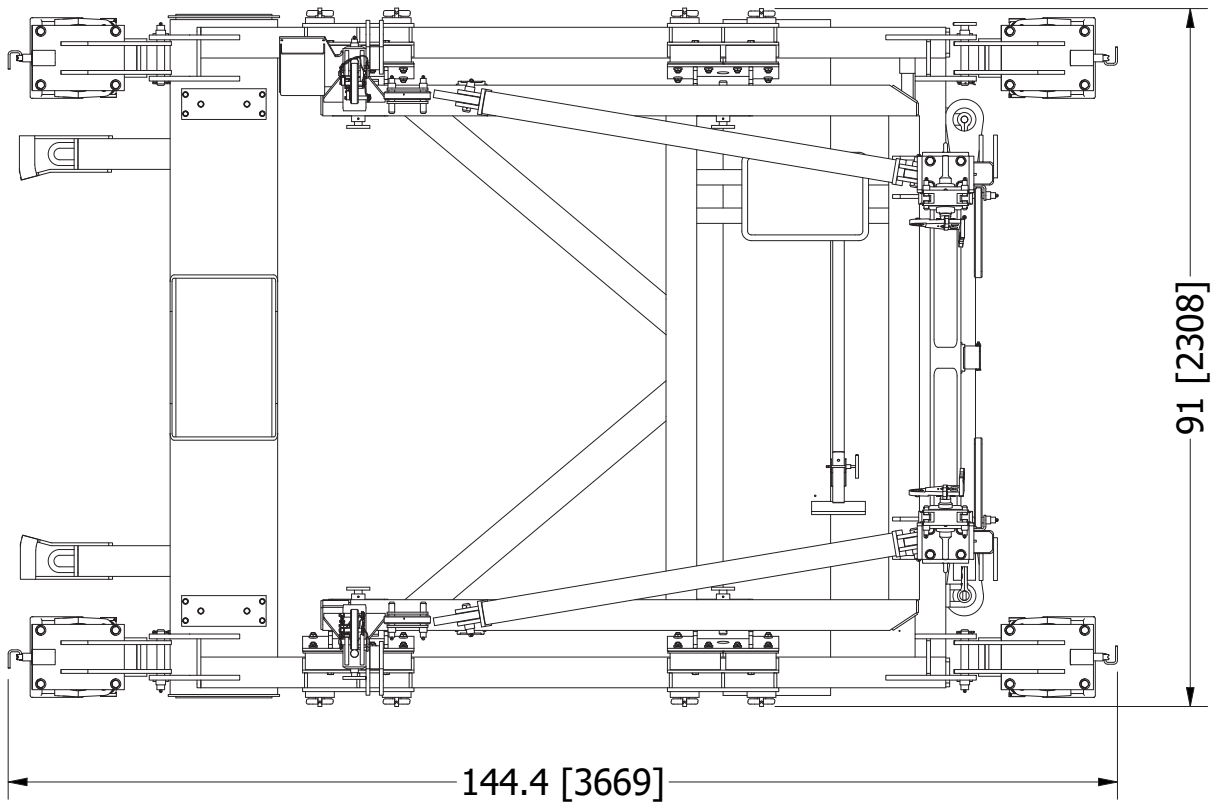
Dimensions of AGSE-E240-G01 Engine Transportation Stand Assembly
